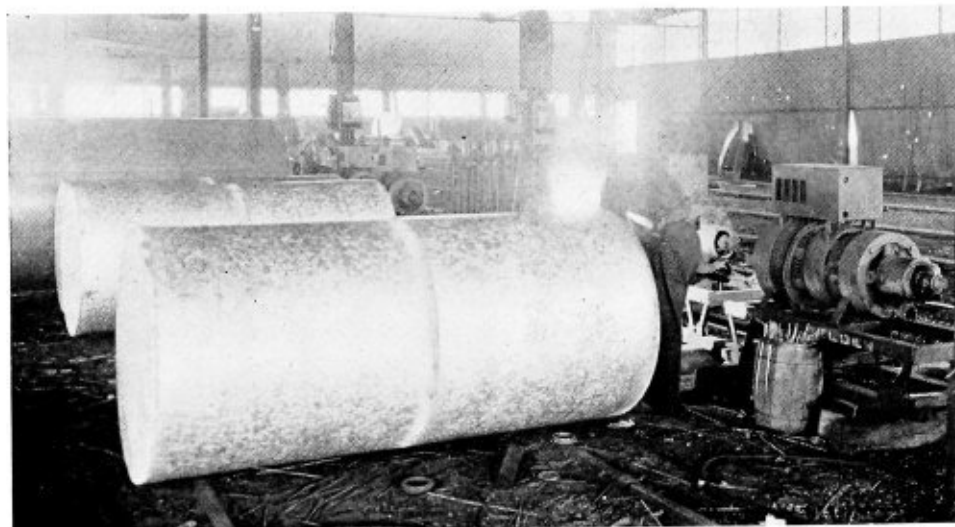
Completing the welding of longitudinal seams. For girth seams a rotating fixture is used in the welding operations
